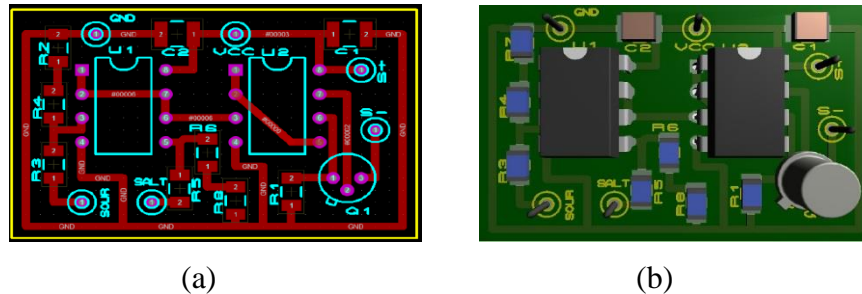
The Printed Circuit Board (PCB). (a) PCB Layout in Proteus. (b) PCB 3-D Top View.
